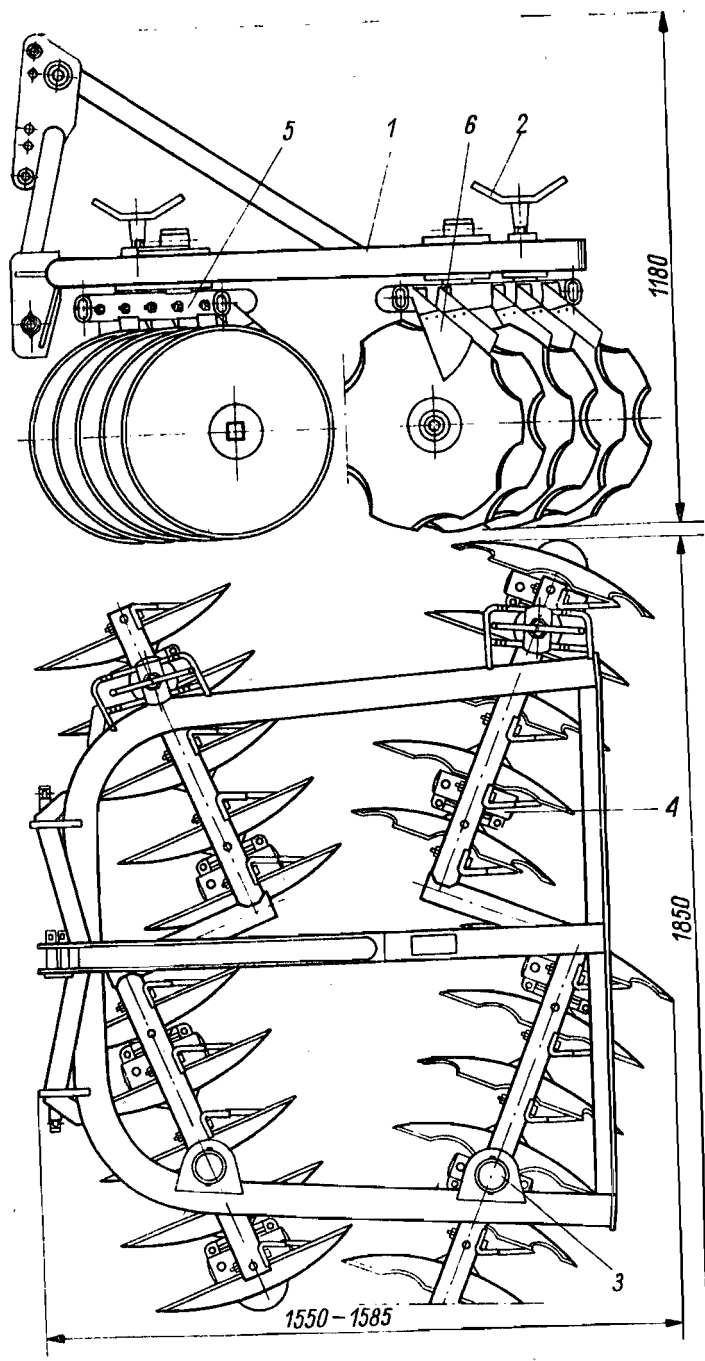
Offset mounted disk harrow: 1—frame with column; 2—control crank for section leveling; 3—vertical shaft; 4—bearing of the shaft of the section; 5—beam of scrapers; 6—scraper of the disk.
